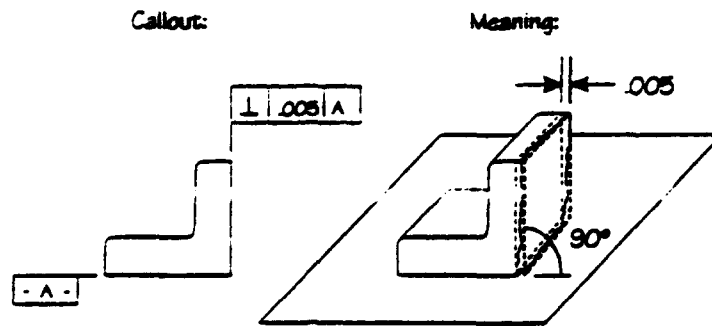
Perpendicularity tolerance (surface) callout and meaning.
